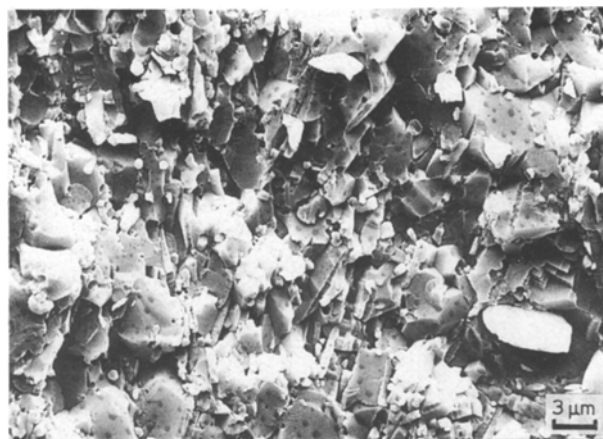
Fracture surface of the TZP composite with 20 vol % leached whiskers.
